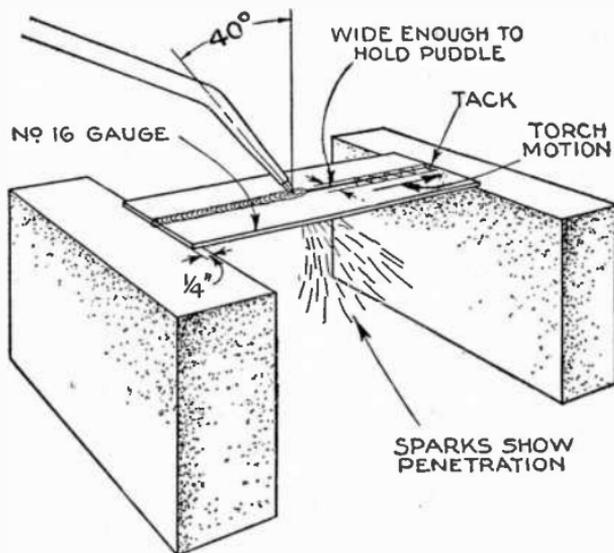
,149.—Position and movement of the torch. *Instructions:* Start welding at the right. Hold torch loosely in the hand and nearly parallel with the top of the welding table. Incline the tip sideways so that it points to the left at an angle of about 45 to 50° to the welding plates. Move the flame across the joint back and forth, giving it a movement of about  $\frac{1}{8}$  to  $\frac{1}{4}$  in. As the steel melts and flows together move the torch to the left slowly following a zigzag path. Keep the torch in motion, but do not move to the left along the joint faster than the advance of the puddle. Be sure that each plate edge receives its due share of the heat. Hold the torch easily. Do not hold the handle tightly. Gripping it firmly tires the muscles, and makes the arm tremble. Learn to work easily and surely. Don't hurry. Continue a uniform zigzag motion keeping the white hot cone just above the surface of the plate. The rate of welding progress is determined by the puddle. Welding can be no faster than the advance of the puddle; neither can it be slower, because if advance toward the torch and puddle be stopped, the hot metal will drop through. When nearing the end of the joint, lift the torch higher to avoid making a hole in the weld at the end. This is an important point in welding thin metals. Pick up the welded plates with the pliers and examine first for uniformity of torch manipulation each side of the joint. This will be indicated by the heat zone. The heat zone should be of uniform width on both sides of the weld. Turn the piece over and examine for penetration, that is, if the weld penetrated to the bottom of the plates.
